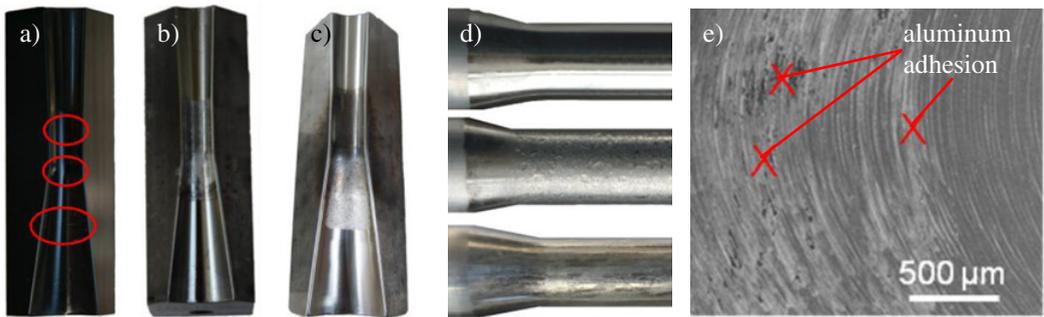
Tools and work pieces after forming a) coated tool; b) plain tool; c) conventional tool (with surface wrinkling of tungsten carbide); d) work pieces of aluminum, formed wet with plain tools (top), formed dry with plain tools (middle) and formed dry with coated tools (down) and e) SEM image of the reduction zone (I) with aluminium adhesion of a coated tool.
